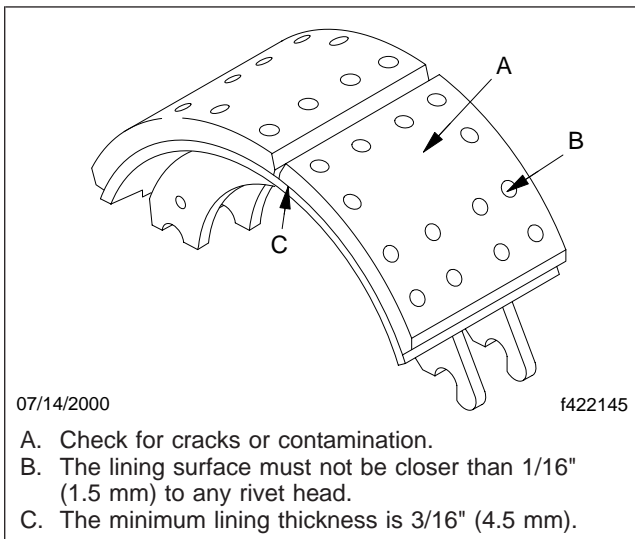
, Inspect the Brake Shoe (15-inch series shown)
